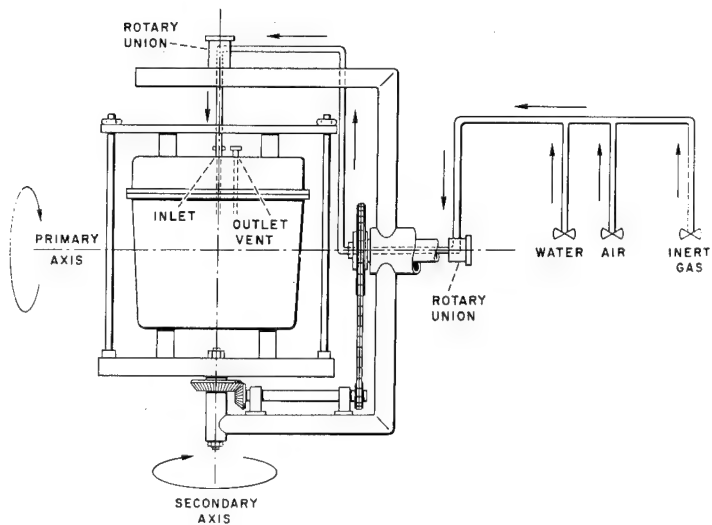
Schematic of rotational molding mechanism for inert gas purging and internal cooling
